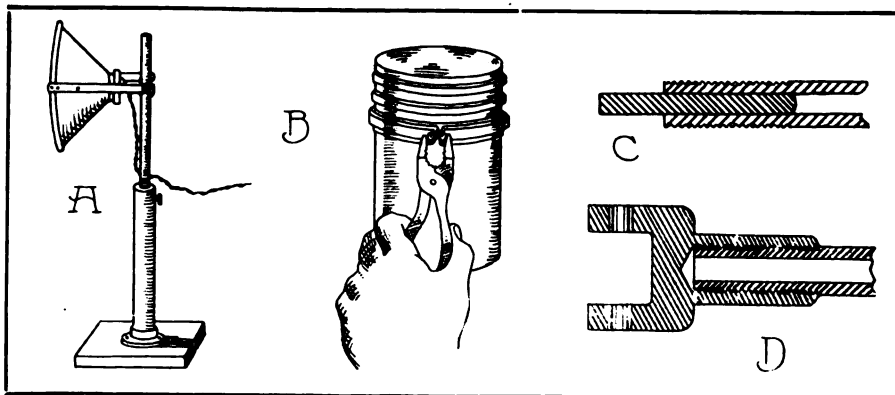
A, Home-Made Washstand Light; B, Handy Piston Ring Compressor; C, Expanding Tie Rod Tube; D, Repaired Tie Rod.
